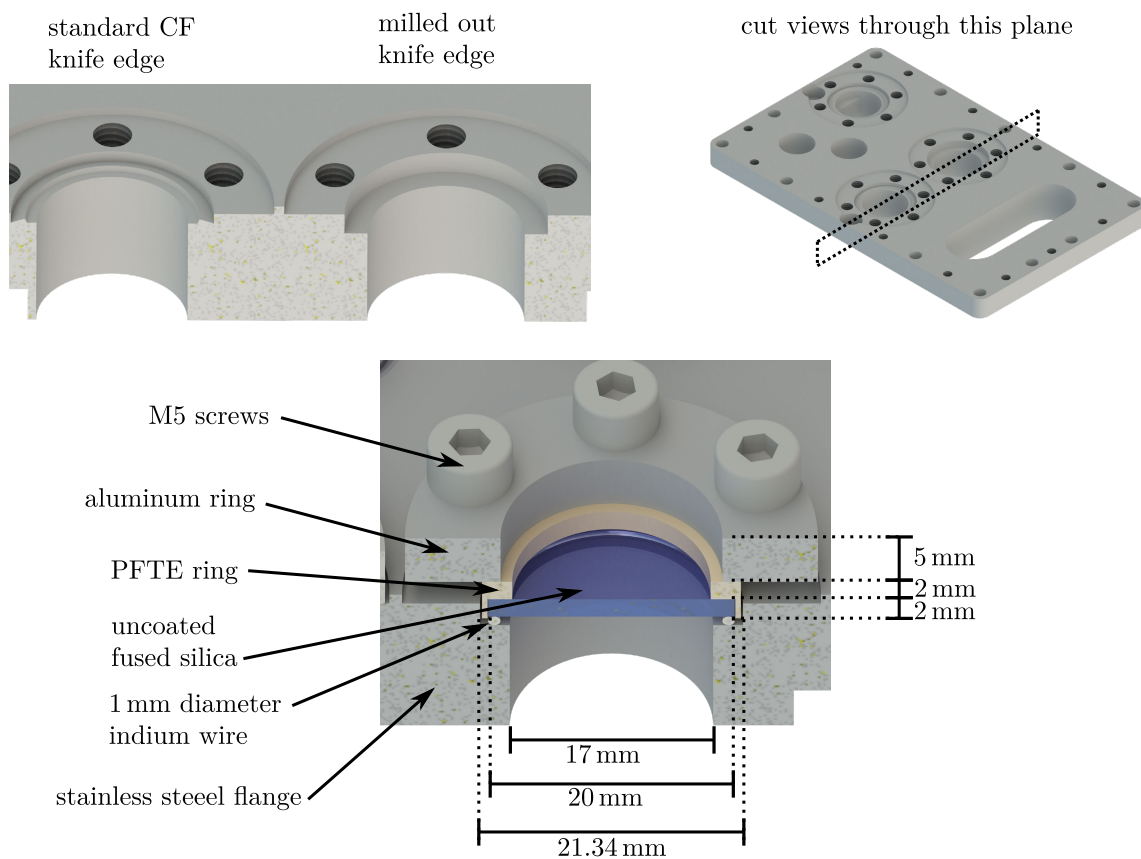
Top right: Custom flange. Top left: cut view through the plane depicted in the top right. The left port has the original CF knife edge. The right side has the newly milled out knife edge. Bottom: Cut view through the indicated plane with attached window. The PTFE ring transfers pressure from the screws to the window which is pressed into the indium ring.
